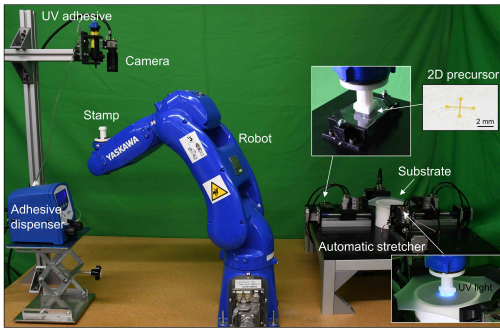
Experimental setup for automated assembly of 3D mesostructures by mechanical buckling.
